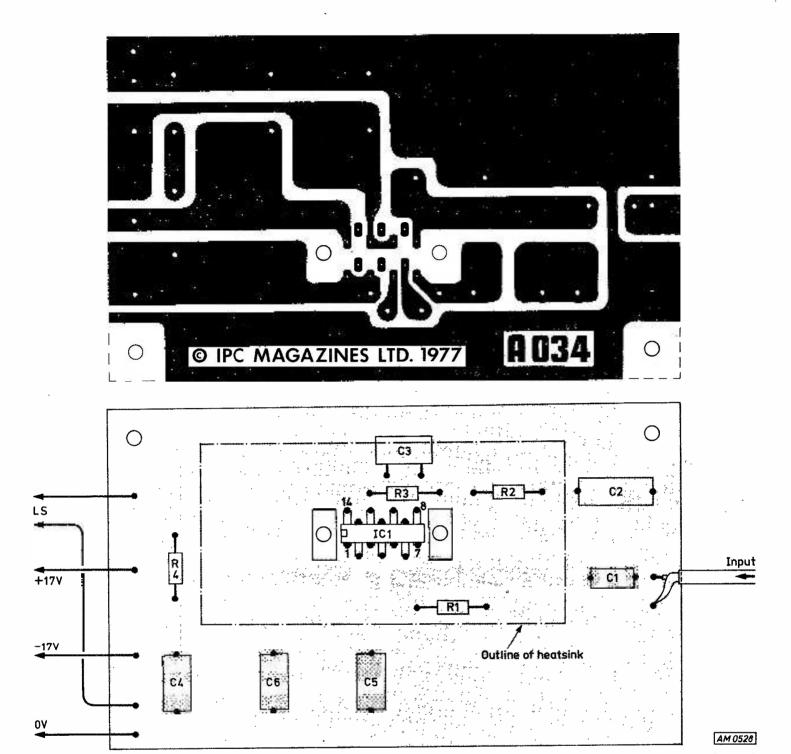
(above) PCB copper side to actual size. Component side (lower) showing positions. During assembly of the board, care should be taken to ensure that components underneath the heatsink do not foul it in any way—the heatsink is electrically in contact with the substrate of the IC via the copper slug on the top of the IC.
